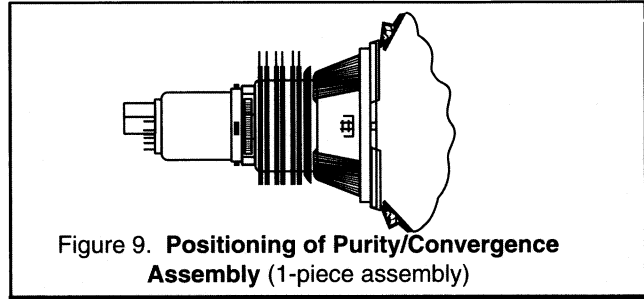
Positioning of Purity/Convergence Assembly (1-piece assembly)
